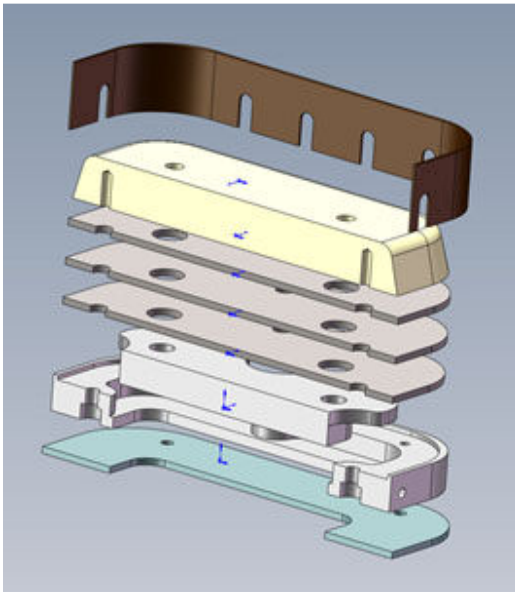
Cross Section showing exploded cutter block assembly (3rd iteration)
